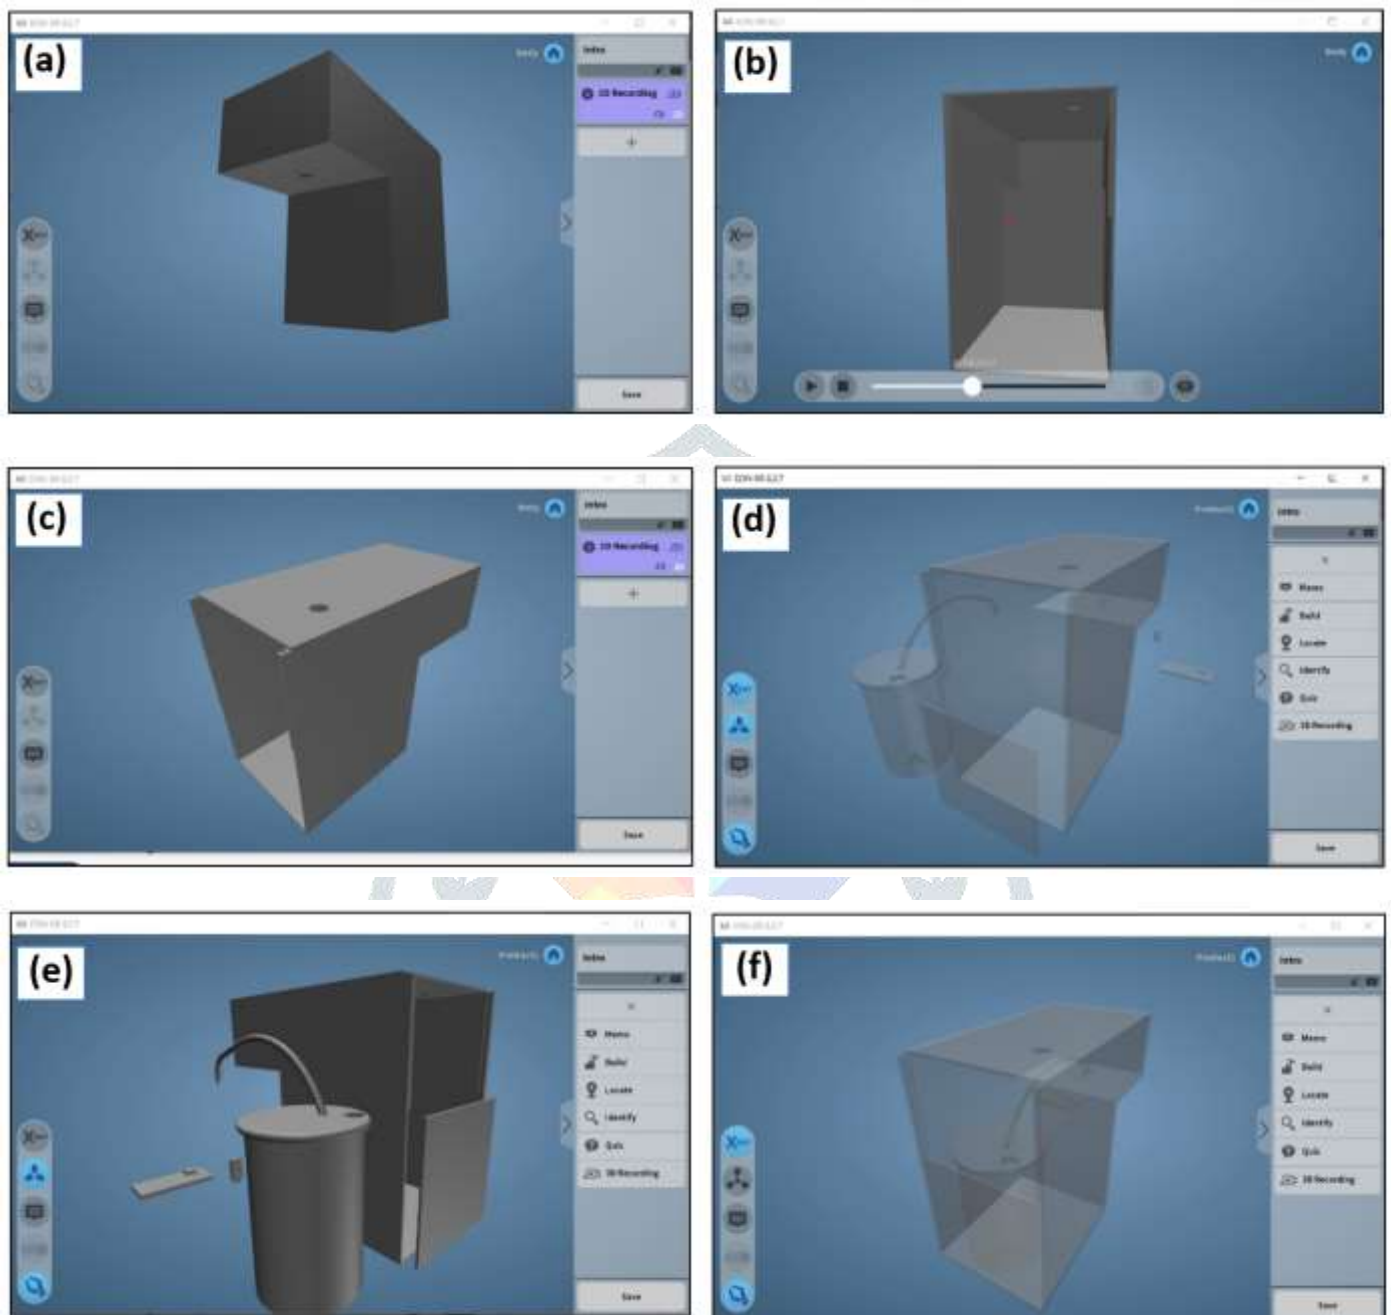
Rendered model on desktop mode (a) – (c) various views of casing body (d), (e) exploded view and (f) assembled view of various components of the automatic hand sanitizer dispenser
